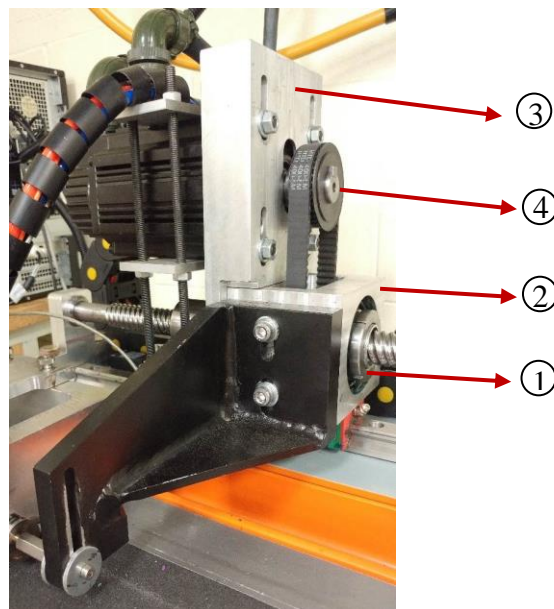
Leading side of the ball screw assembly. Piece 1 is the carriage arm; 2 is the bearing house; 3 is the motor fixture; 4 is the primary pulley
